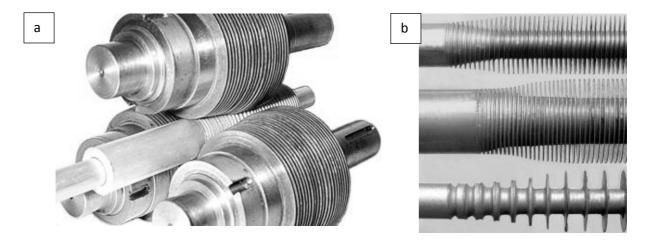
The manufacturing process of finned tubes: a) a set of three rolls of rolled tube, b) high finned tubes manufactured by depressing and grading [9]
